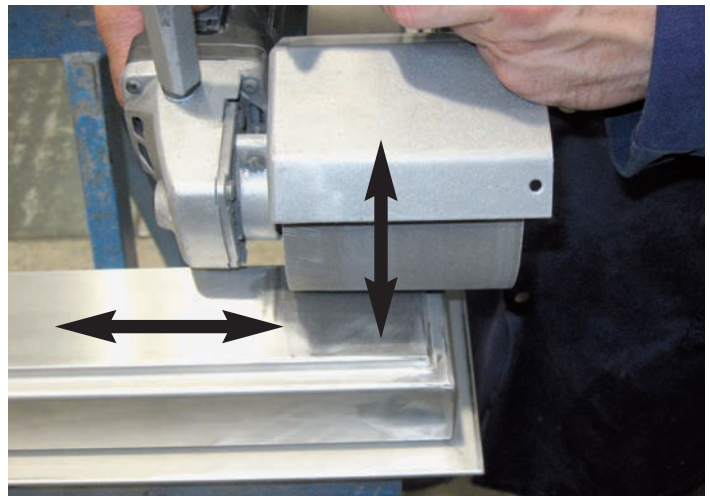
Intermediate linishing with a linear polishing machine and linishing sleeve
